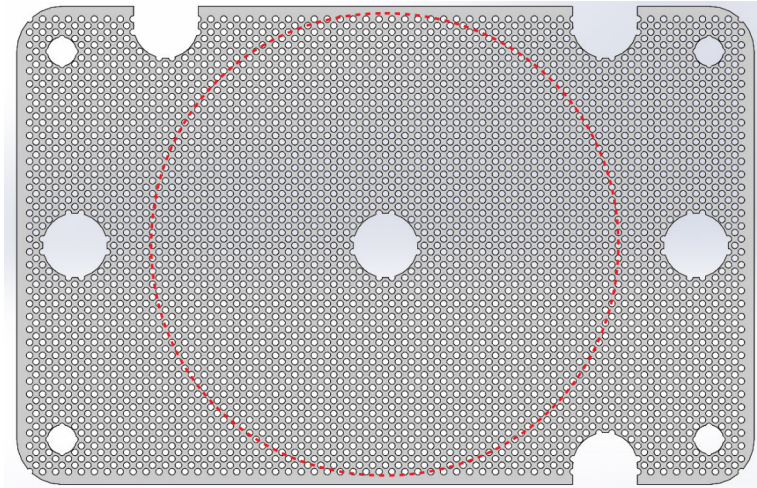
2D view of the exhaust grid mainly used during experiments. The red circle indicates the intermediate flange inner diameter through which the gas is actually pumped.
